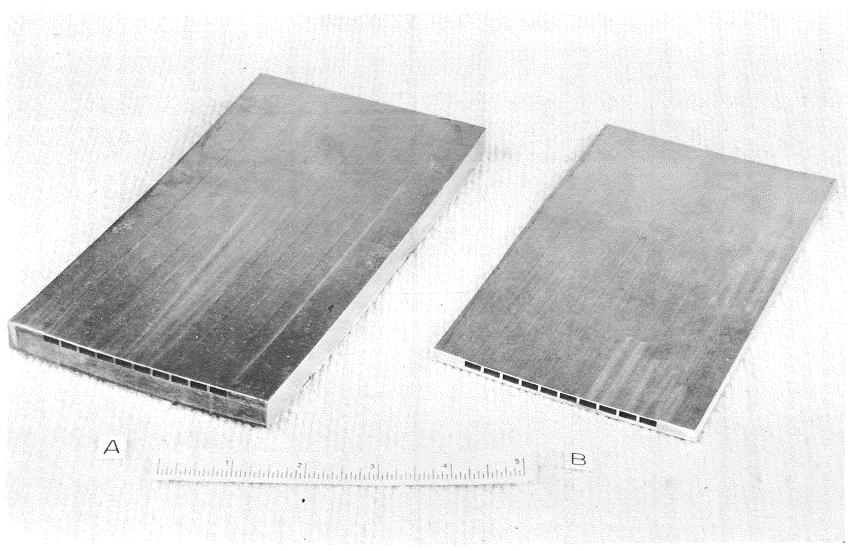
EXPLOSIVELY FABRICATED PANEL SPECIMENS
